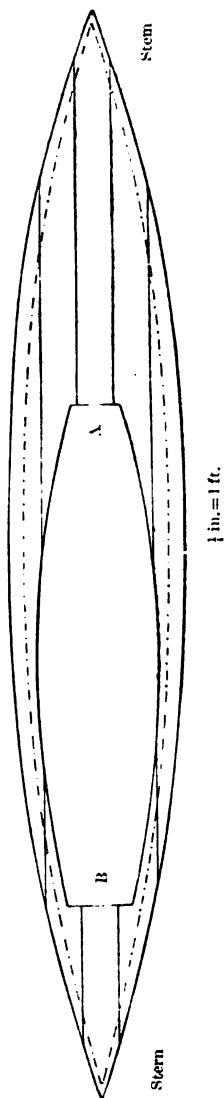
SURFACE VIEW OF PUNT SHOWING DECK-PLANKS FIXED
